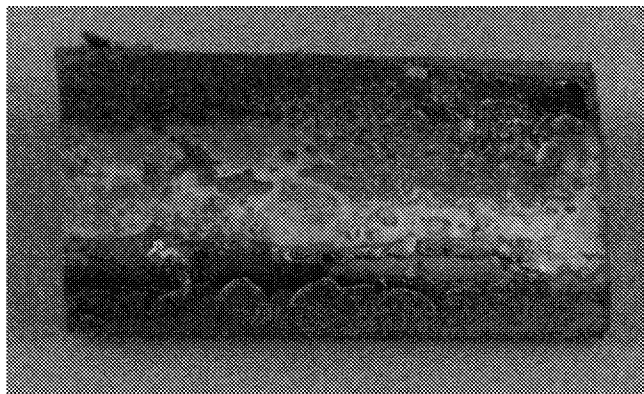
Photograph of uncoated AC Mo-41Re “D-shaped” tube after PyC/SiC deposition (#17).
